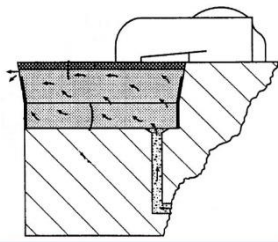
Cutting holder with cutting insert having internal cooling [10]
